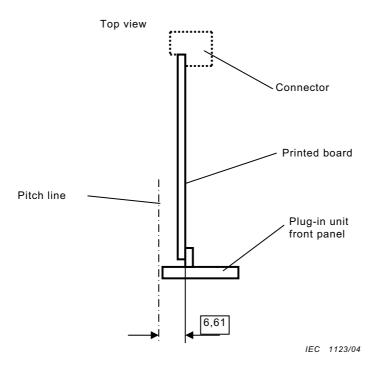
Reference plane for printed boards with 2,54 mm offset position
